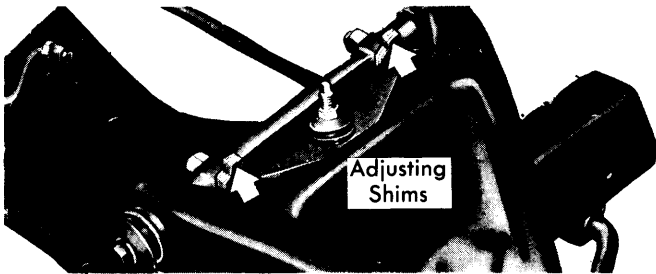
Front Caster & Camber Adjusting Shims (Corvette)
